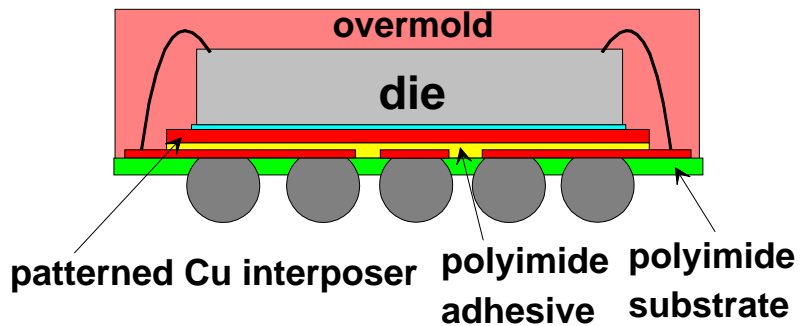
Cross sectional drawing of the assembled small enhanced flex array package with copper interposer.
